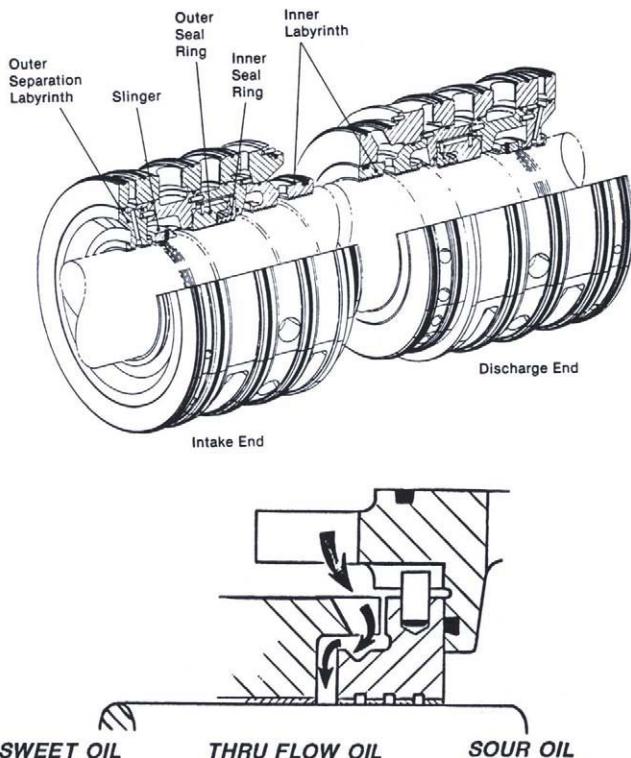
Bushing seal – top: oil film seal; bottom: seal oil flow (Courtesy of Dresser-Rand)
